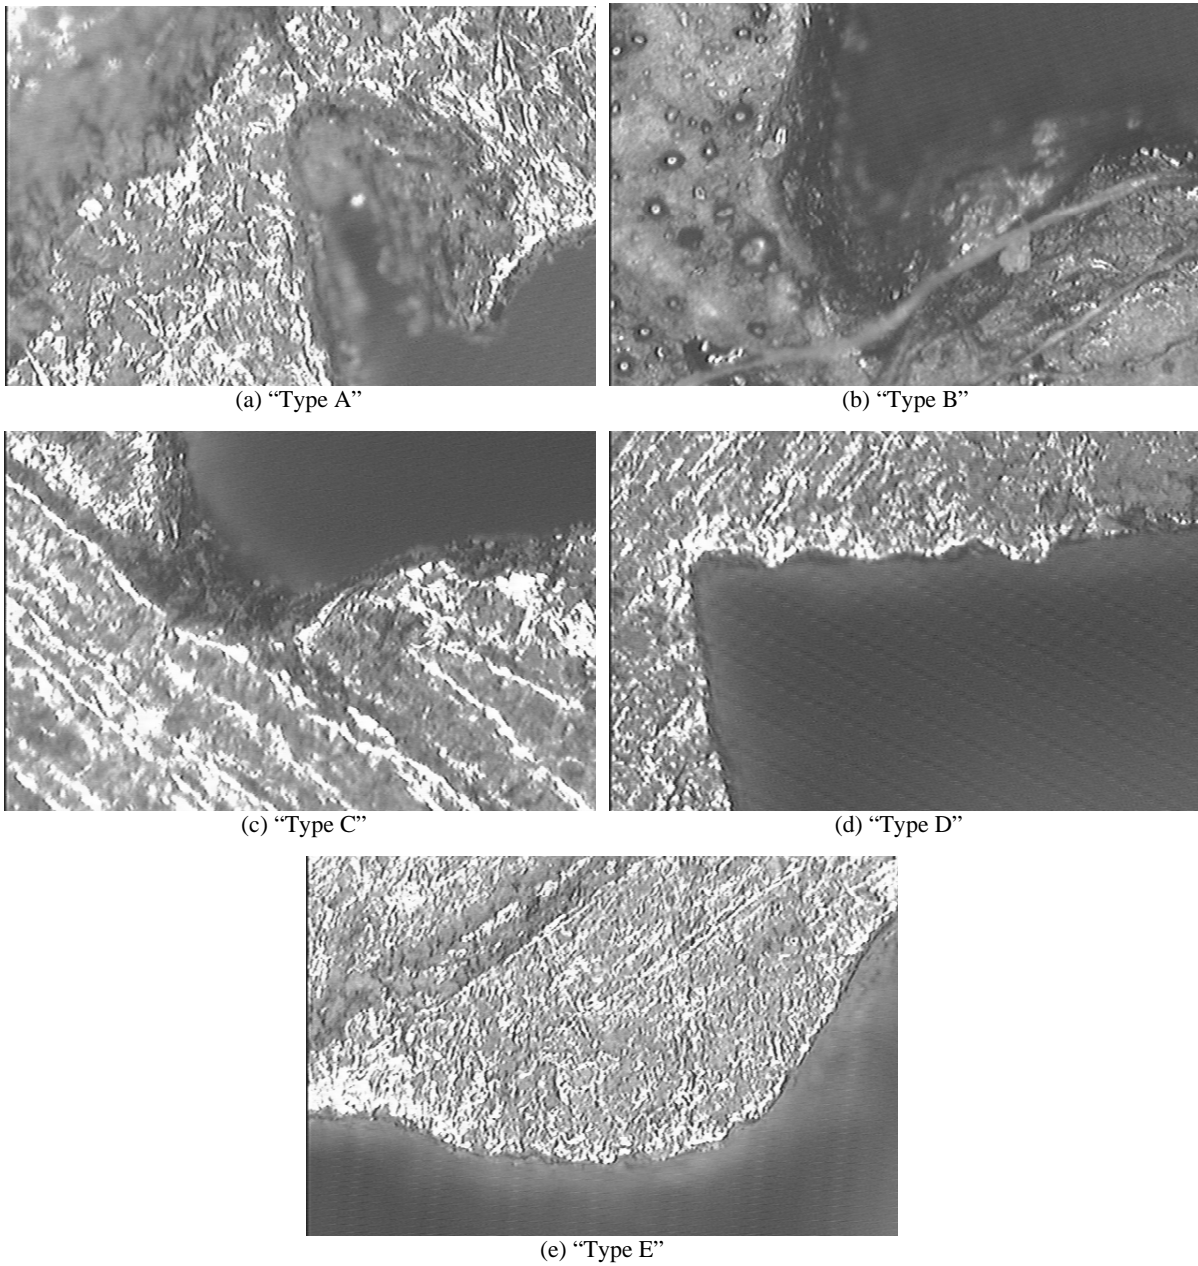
Microscopic images of the lack of weld penetration for the different weld types.
